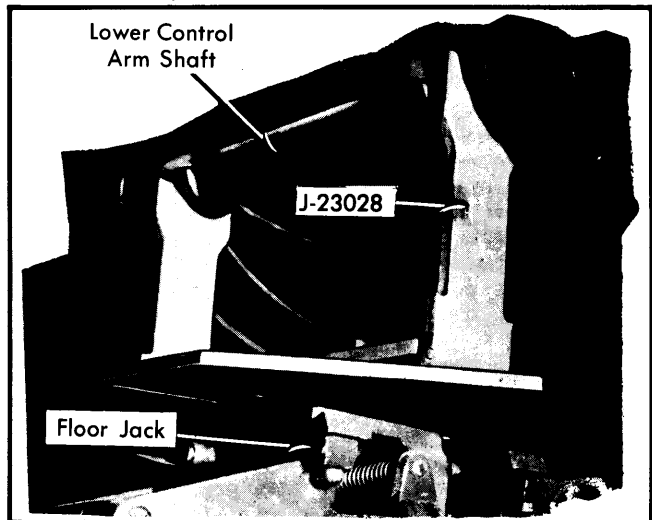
Coil Spring Removal Using a Floor Jack and Special Tool
